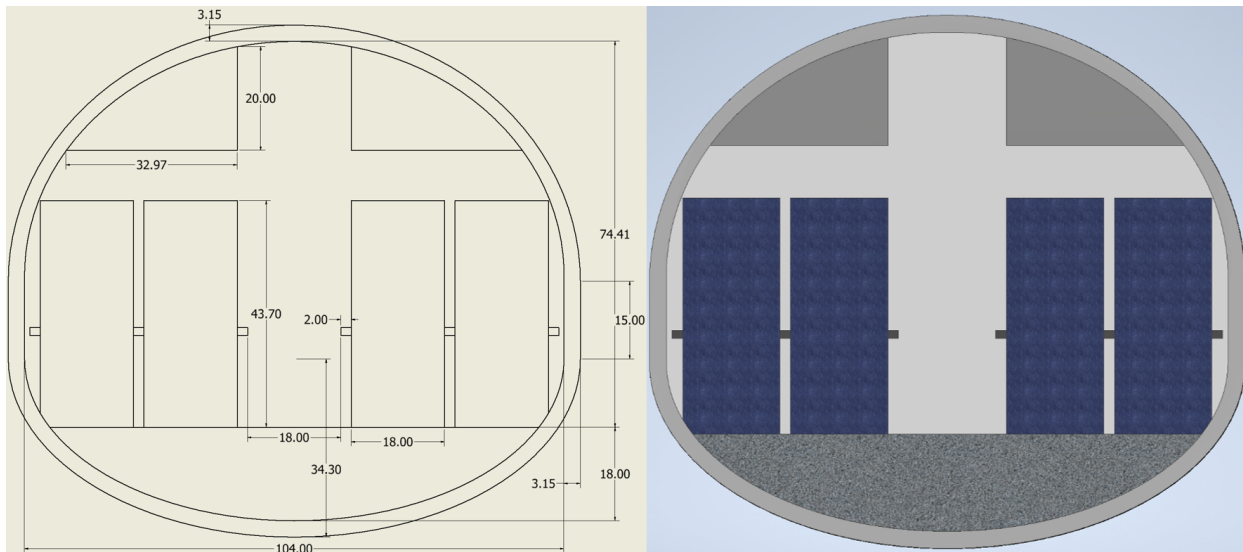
Cross-Section of the Passenger Cabin (Dimensions in Inches)
